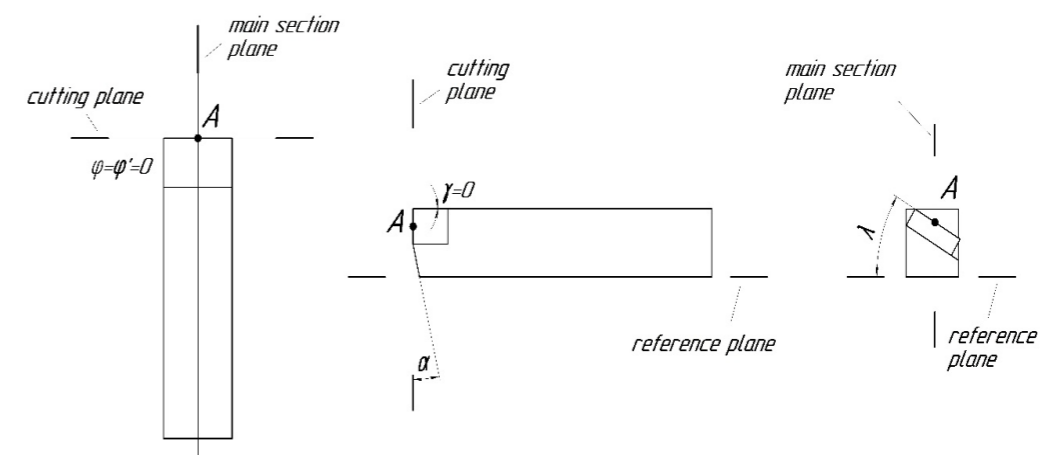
Geometric parameters of the cutting part in the tool coordinate system
